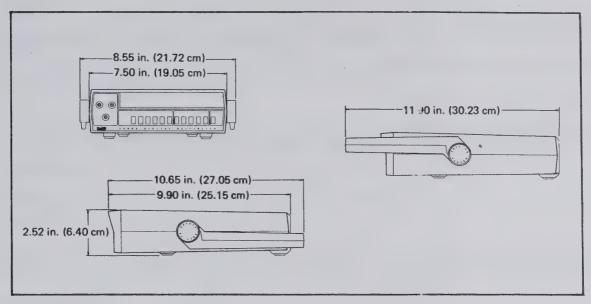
MODEL 8000A OUTLINE DRAWING.
